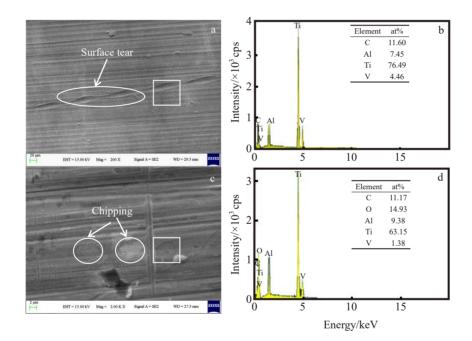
SEM morphologies (a, c) of workpiece surfaces after machining under canola oil+graphene condition; EDS results of marked rectangle area in Fig.15a (b) and Fig.15c (d)
